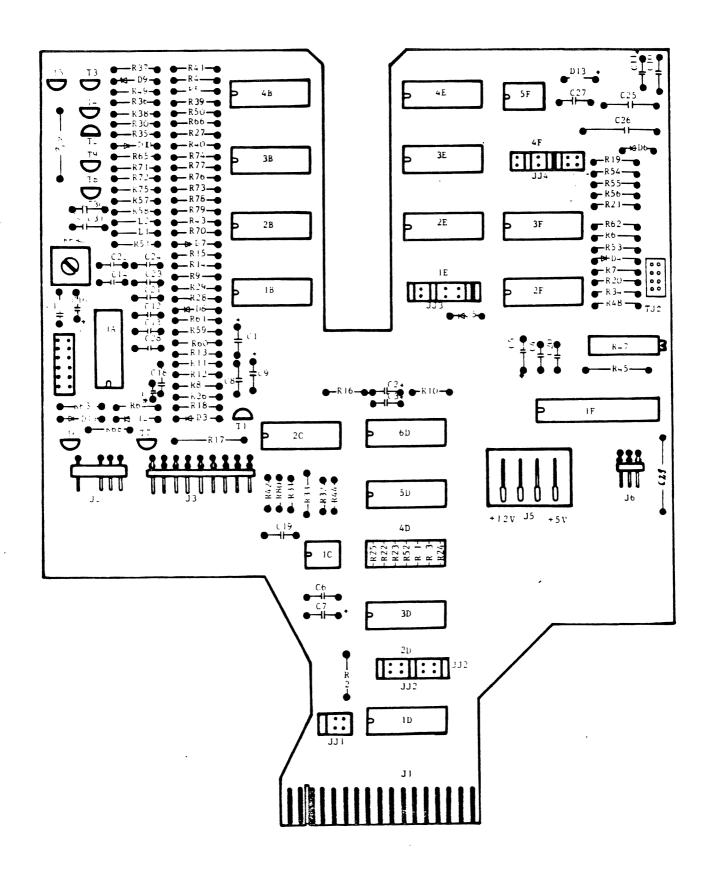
2 . READ/WRITE CONTROL PCB COMPONENT LOCATIONS
